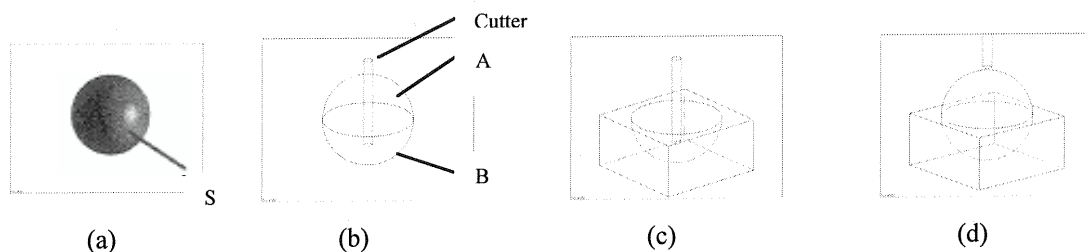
(a) Sphere S (b) Surfaces A and B on the sphere (c) Machine Surface B (d) Machine Surface A
